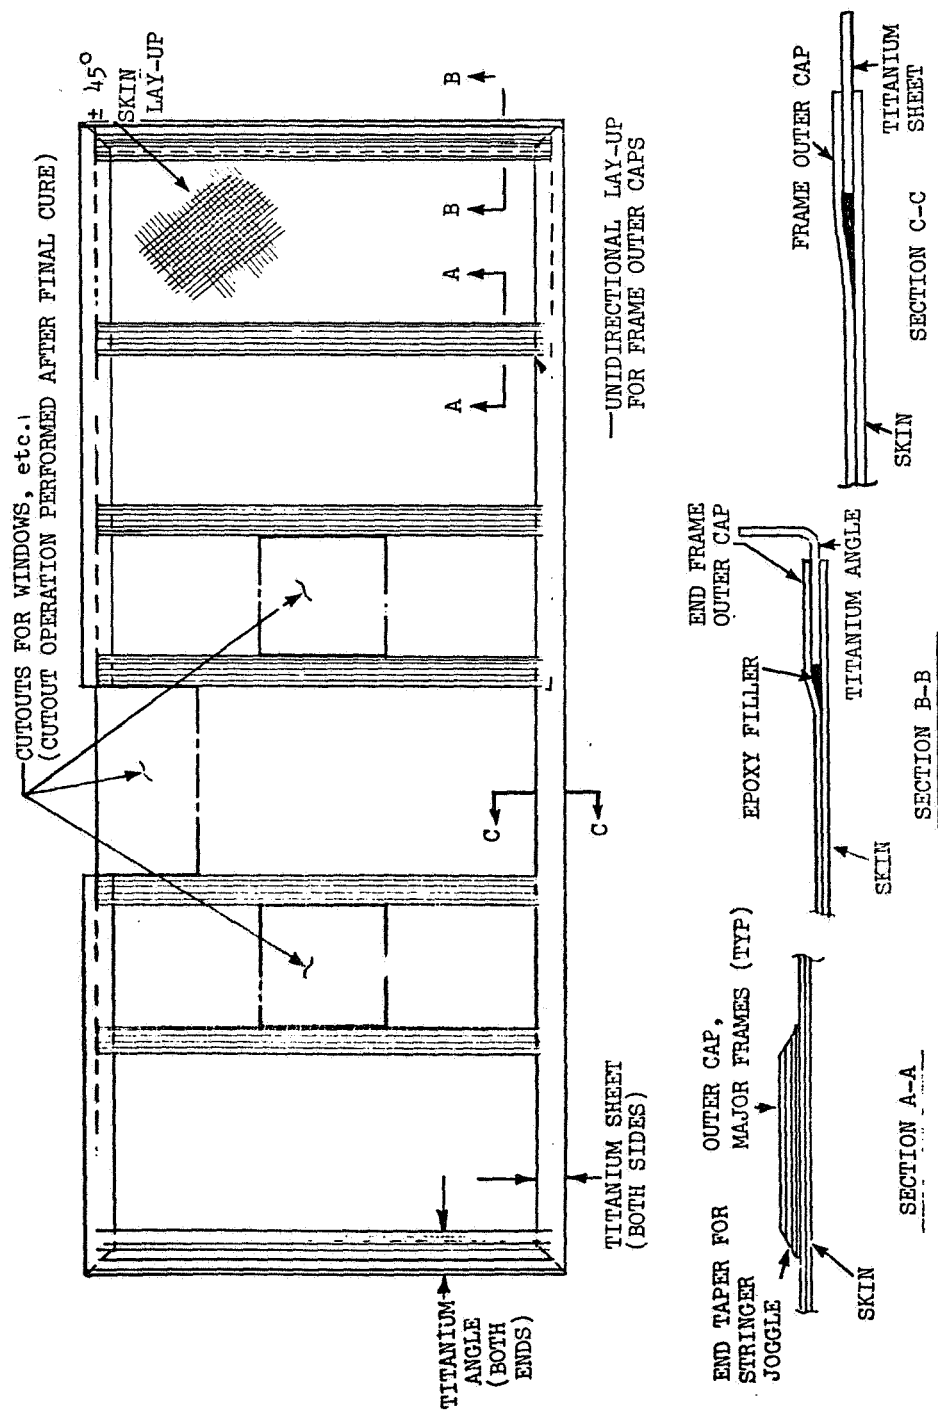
FLAT PATTERN OF LAY-UP FOR CABIN SKIN SEGMENT AND FRAME OUTER CAPS.
